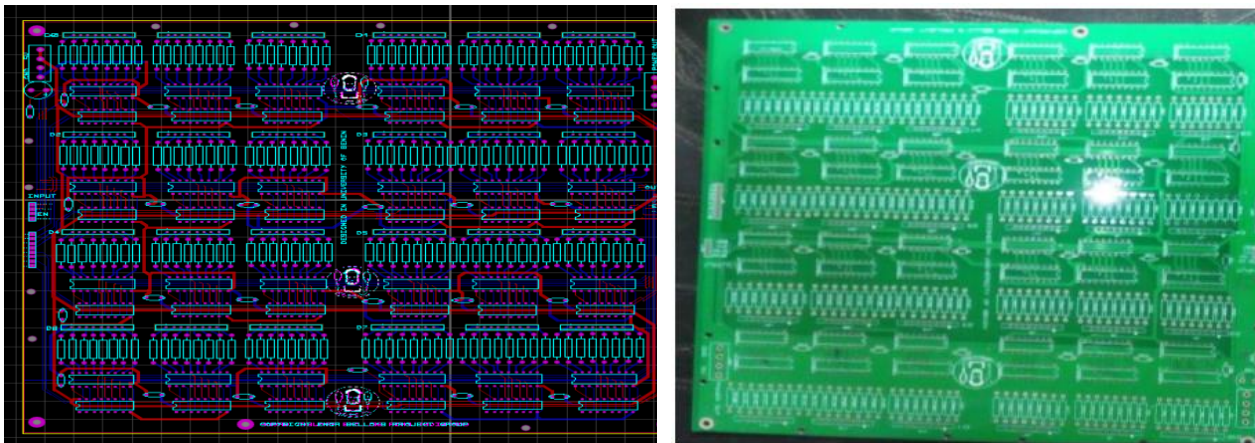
(a) Cathode Driver Board PCB Layout Designed IN ARES (b) Cathode Driver Board PCB Layout Designed in ARES
